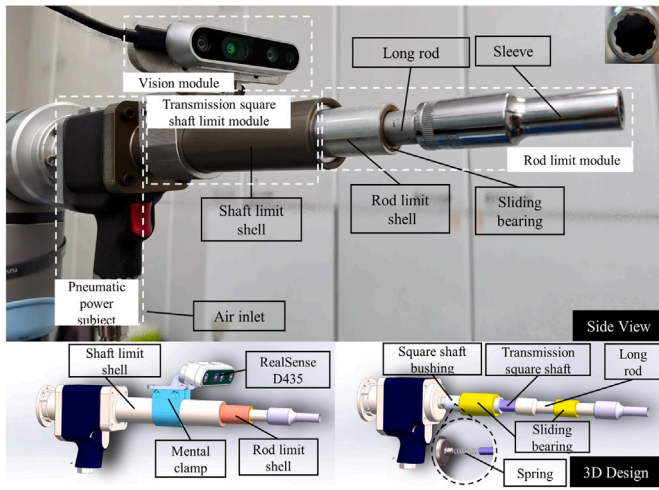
(Top) The structure of real machine. (Bottom) Internal structure of the disassembly actuator.
